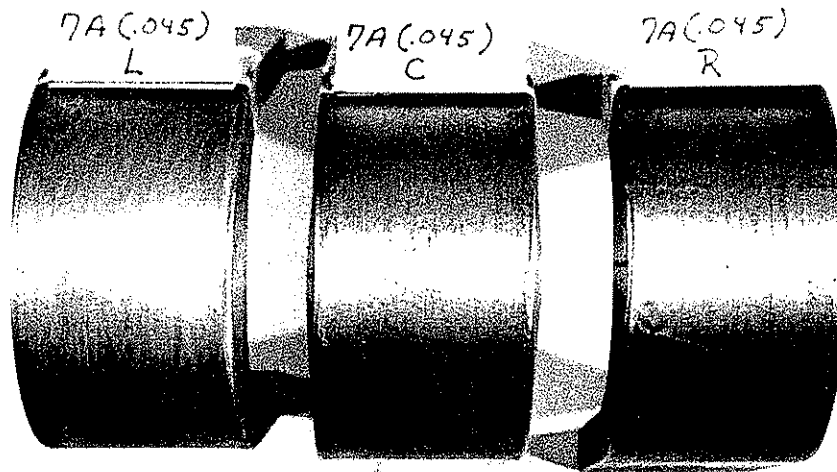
Side Bend Test Specimens from Flange Splice 7A
